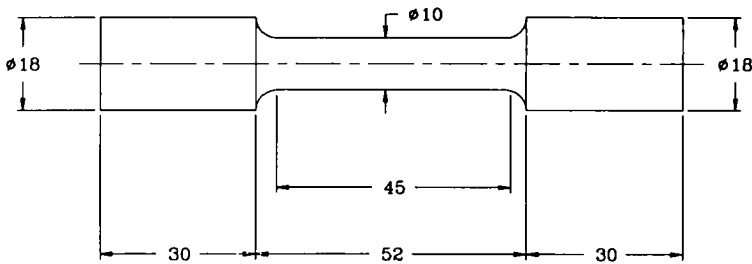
Geometry of the tensile test specimen of the epoxy adhesive. Dimensions in mm.
